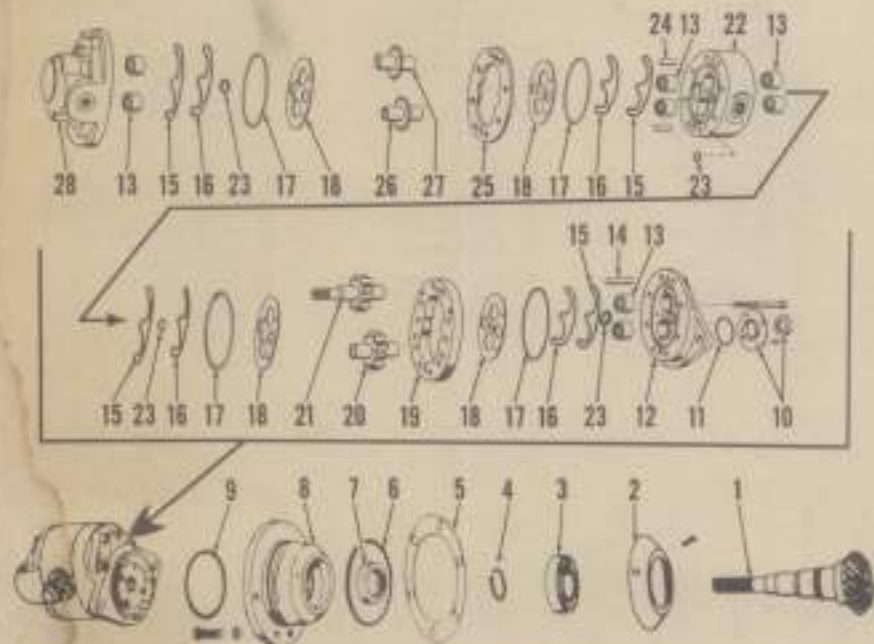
Exploded view of gear type hydraulic pump used on Series IV D-17 tractors. Small gears (26 & 27) are for "Traction Booster" system.
